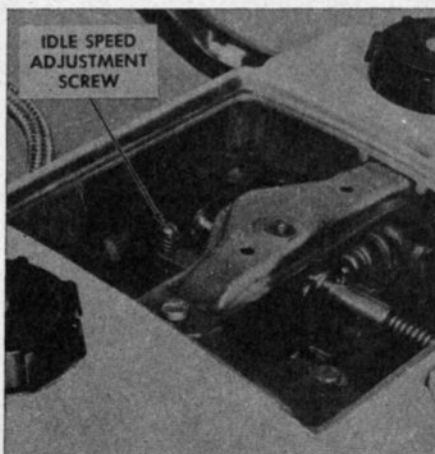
Air cleaner cover and filtering element must be removed to gain access to idle speed adjustment screw on carburetor.
